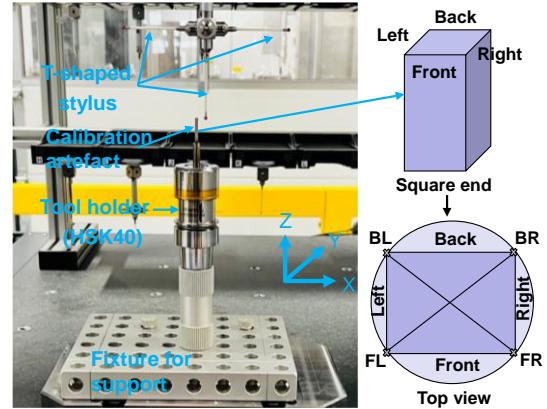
Experimental assembly for CMM measurement with the actual artefact (artefact + tool holder HSK40) mounted on a fixture.
